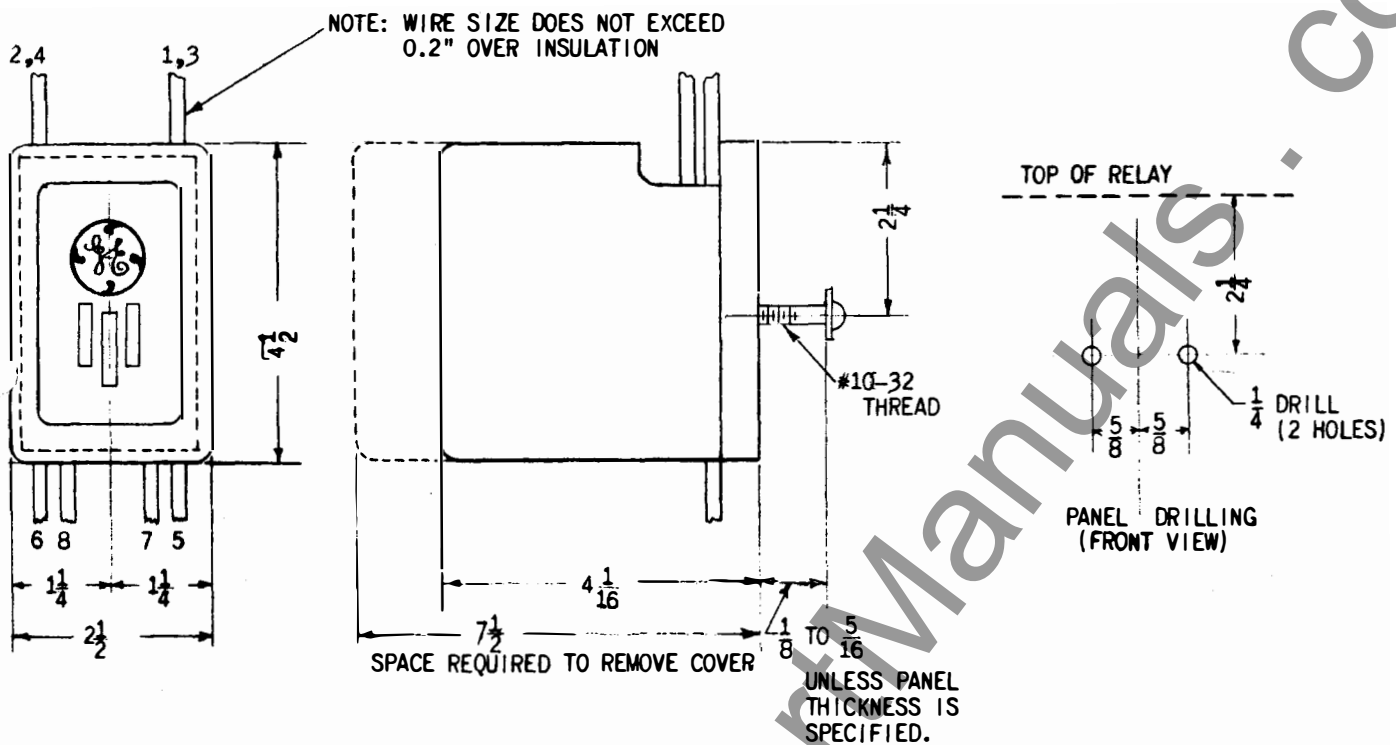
Outline And Panel Drilling For Surface Mounting Of HGA17D And HGA17E Relays
